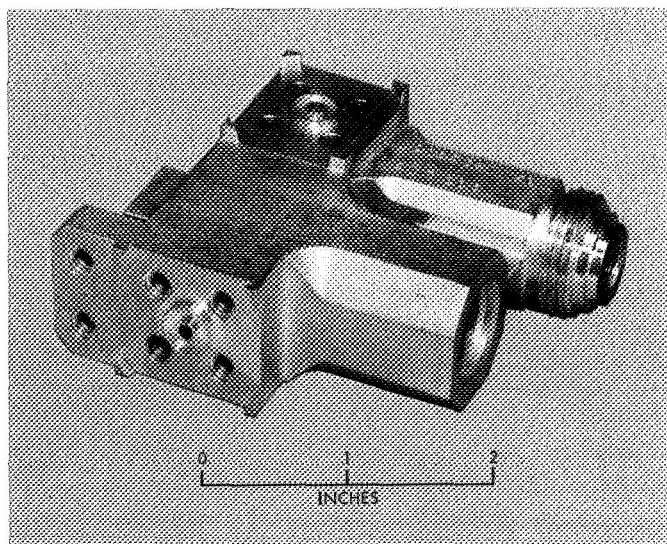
Scan latch manifold assembly (without squib and fill cap)
